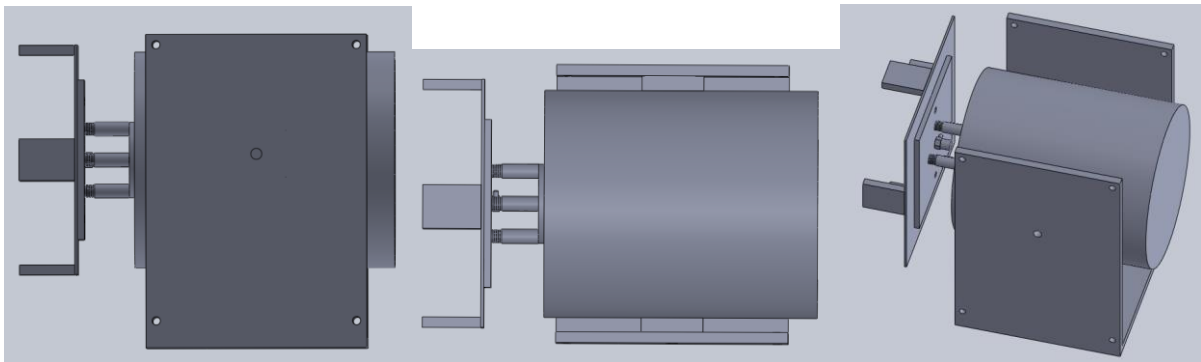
Lateral (left), upper (center) and isometric view (right) of initial assembly
